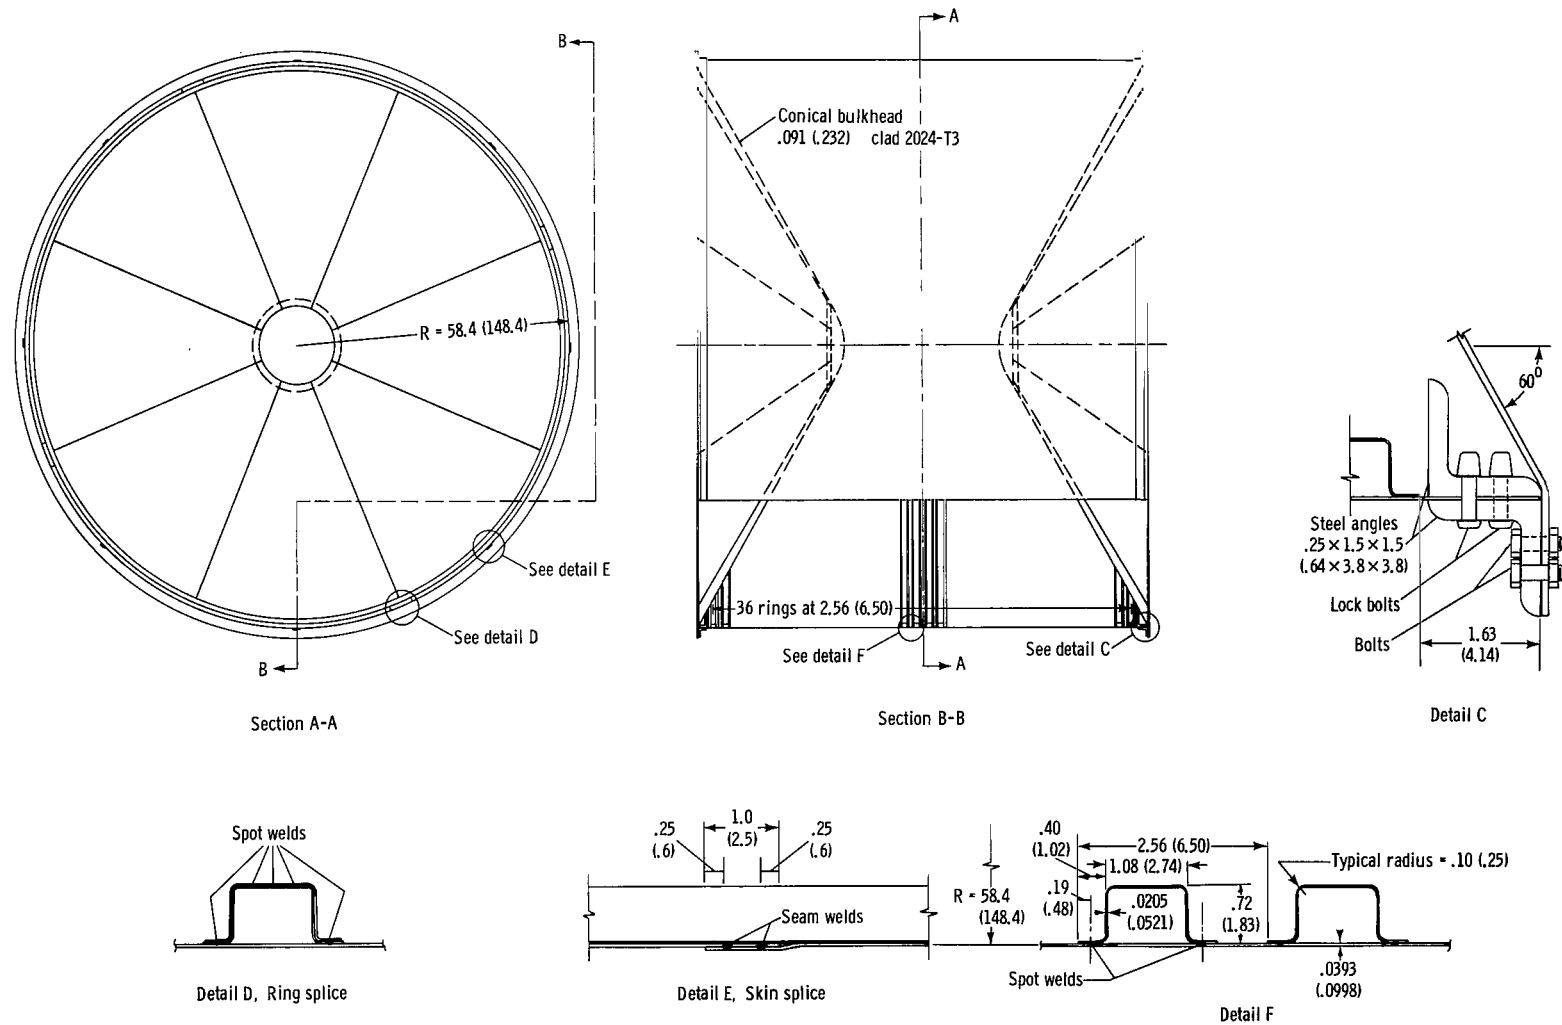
Construction details of test cylinder. Dimensions are in inches (centimeters).
